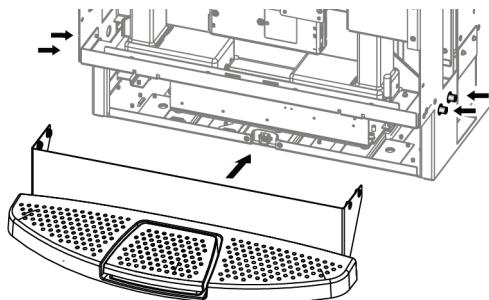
Installing x-ray footswitch assembly (which includes new lower front panel kick plate)
